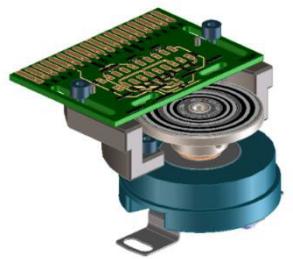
Evaluation Board AEDR-9920 Mounting Concept
